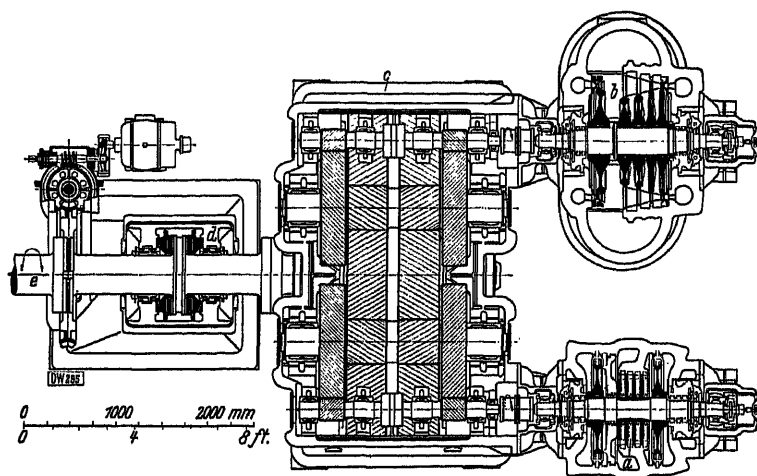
A.E.G., 5400 S.H.P. two-casing marine turbine with double-reduction gears. Speeds 3600/650/84 R.P.M.
